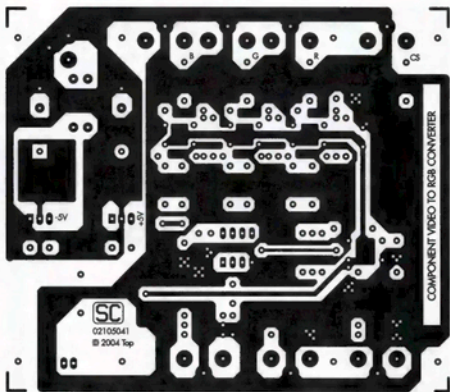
this is the full-size etching pattern for the top side of the PC board.
